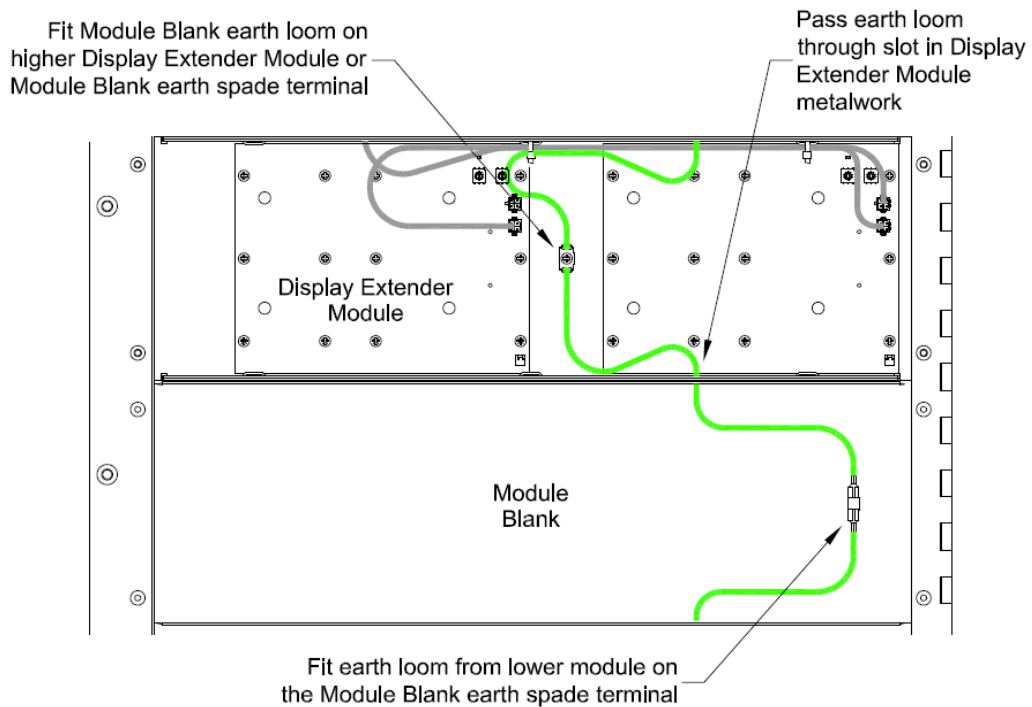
QE20 UI Blank Extender Earth Wiring – Lower Position
